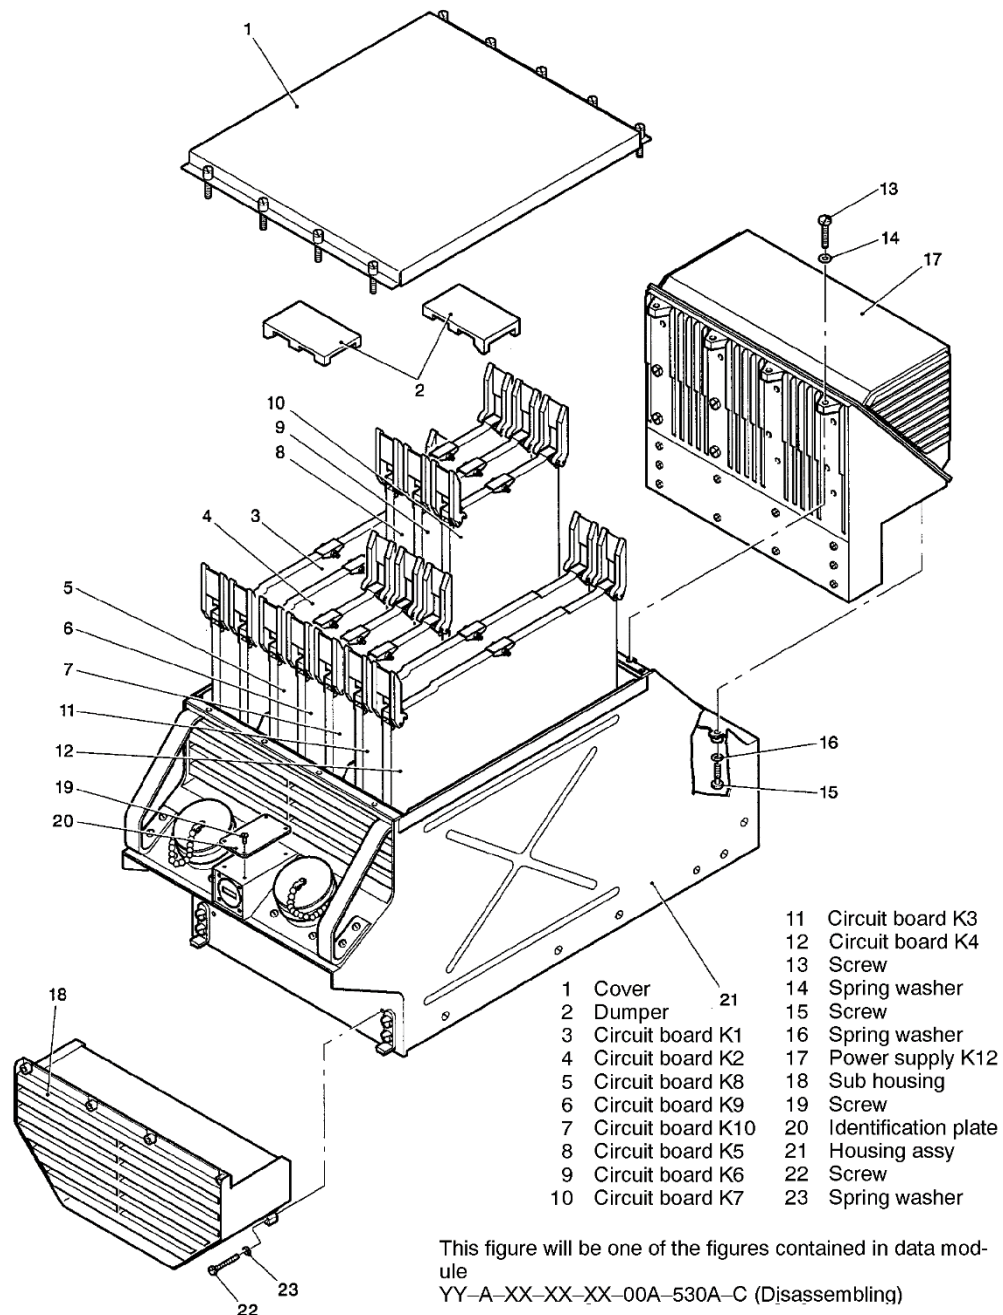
Disassembly code 00 (Assignment of subjects of disassembly) (Sheet 1 of 2)
